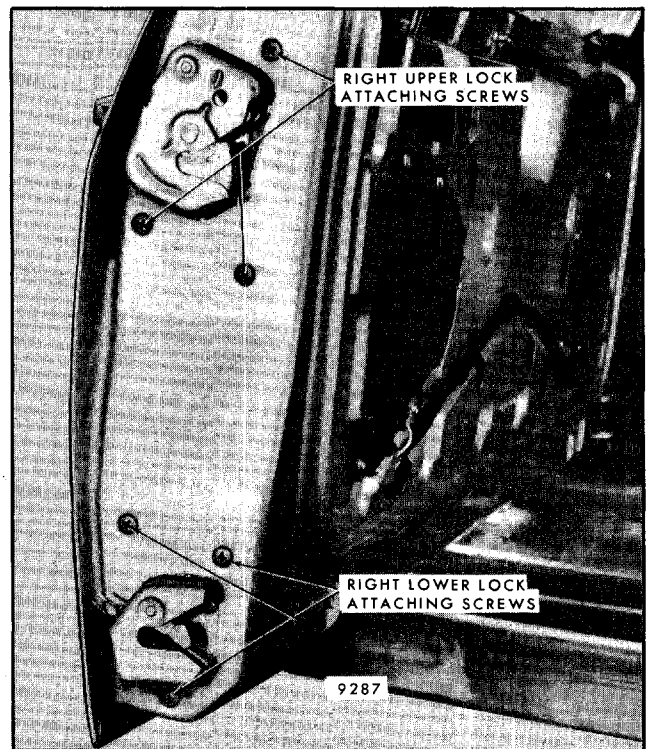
Tailgate Right Upper and Lower Lock Attaching Screws
